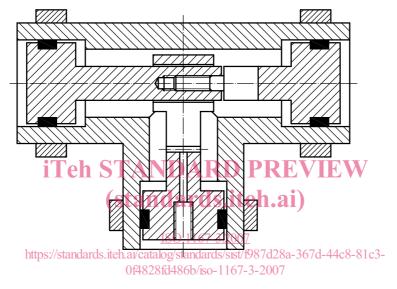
Example of pressure-tight test piece with internally pinned joints and ring seals and without hydrostatic end thrust
